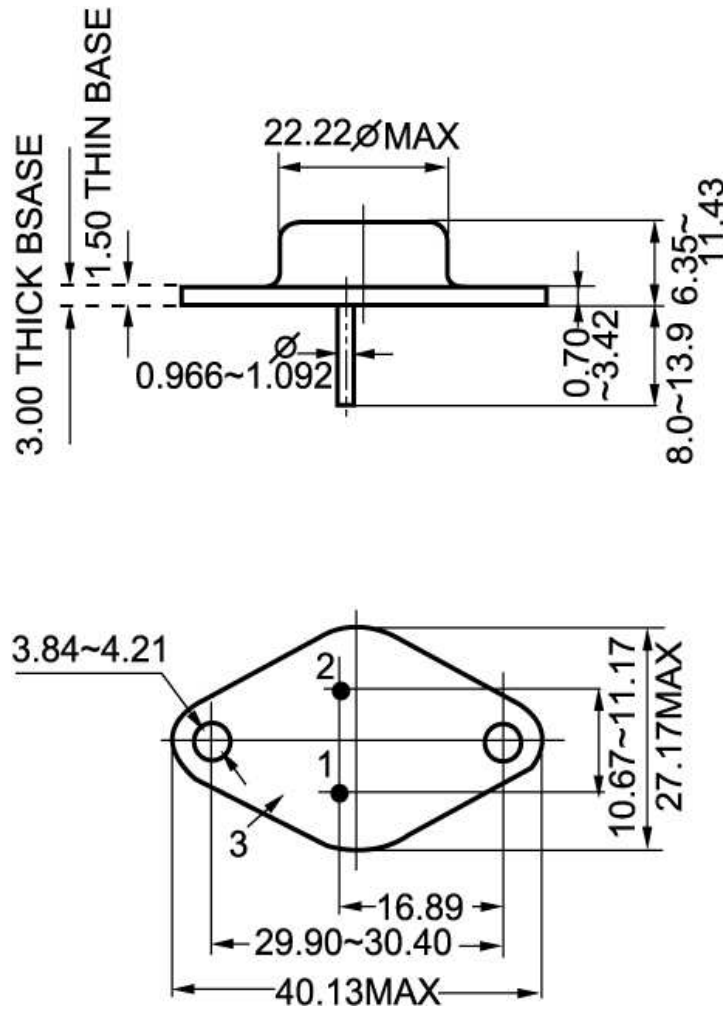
outline dimensions (unindicated tolerance:±0.1mm)
